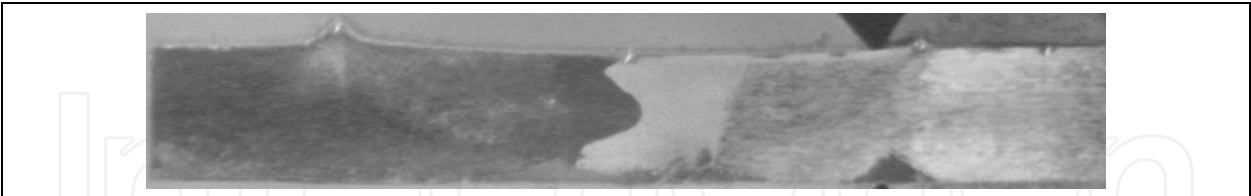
Image of the weld between 2198 and 7475 alloy plates.
